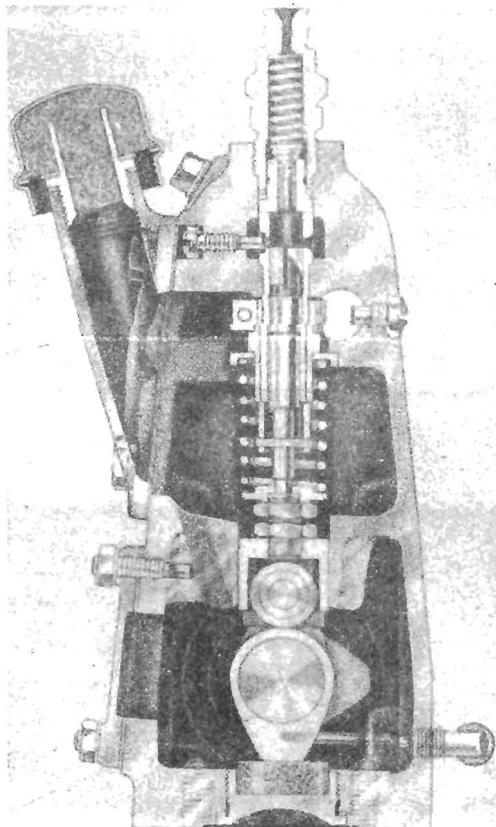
Cross sectional view of Bosch fuel pump (courtesy of American Bosch Corporation).
